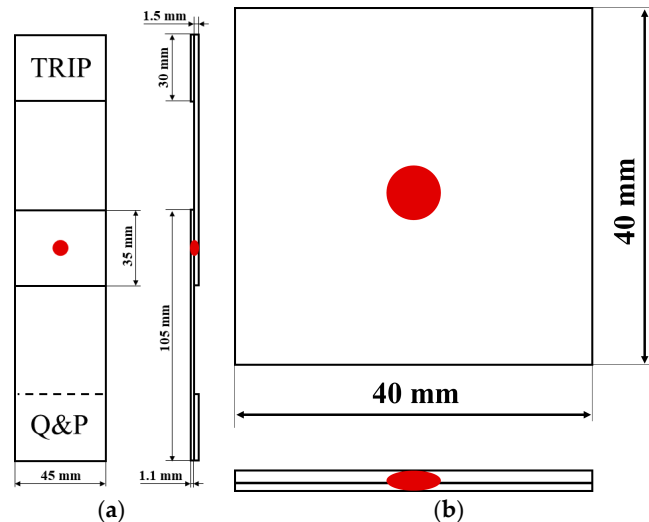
Size of the (a) lap shear and (b) salt spray specimens. The red spot represents the spot weld in the welded samples. Drawings not to scale.
